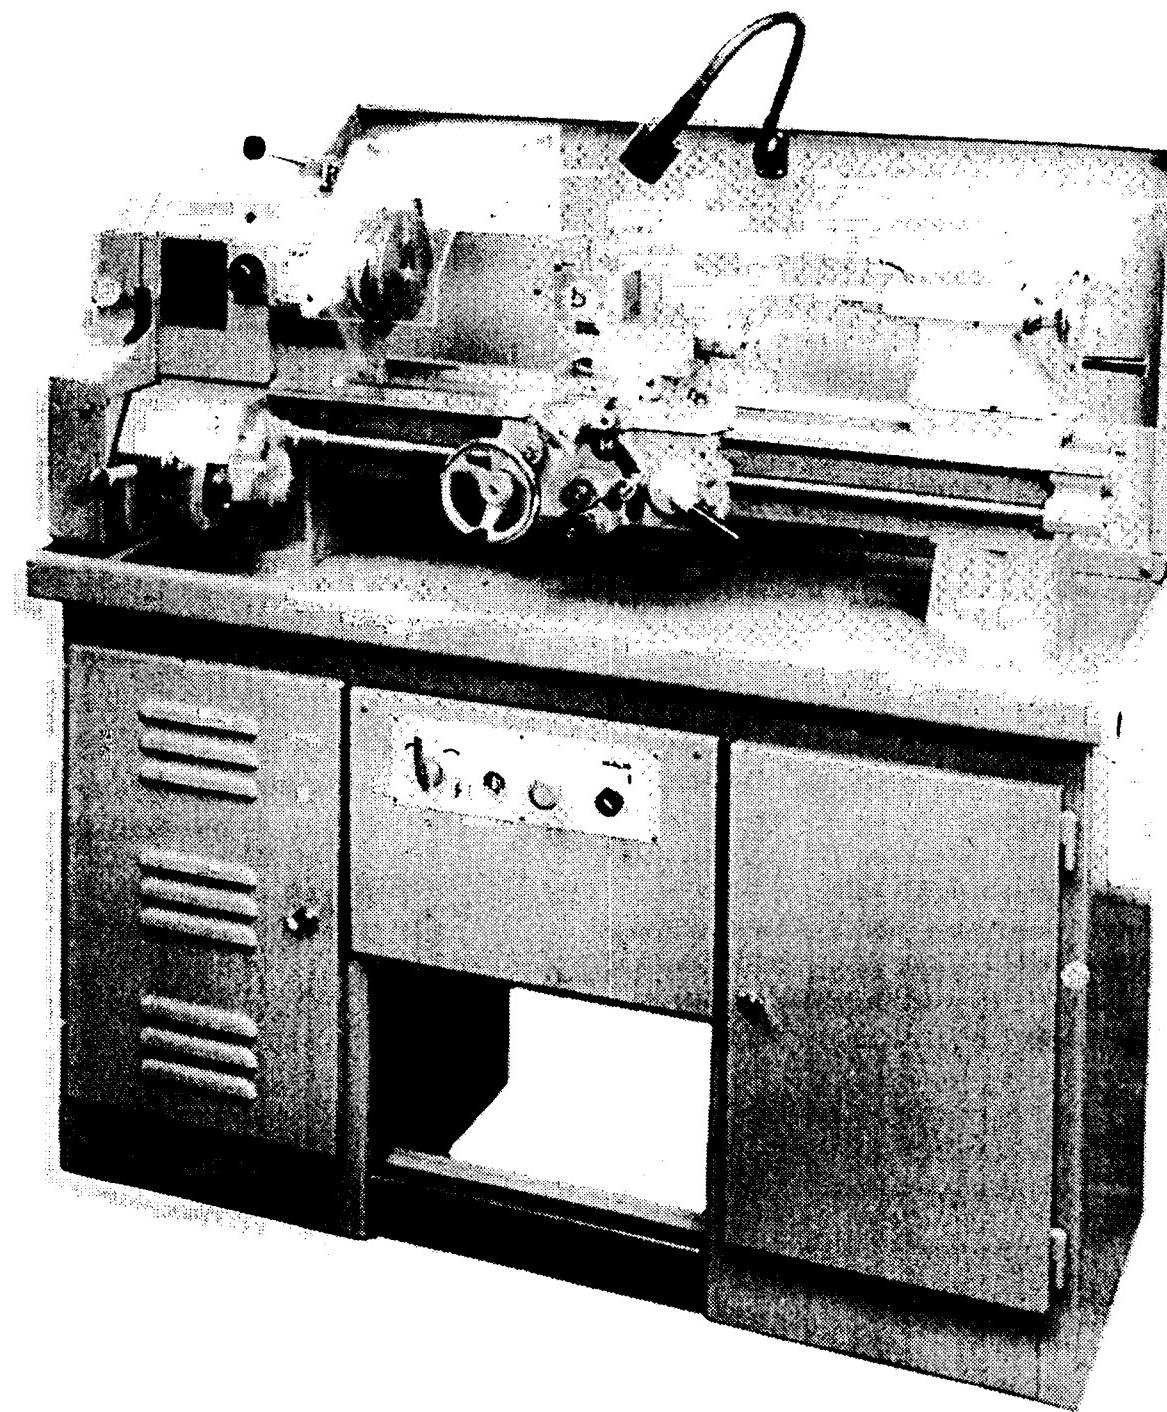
Underneath Drive Cabinet Mounted Lathe (Model AUD)
